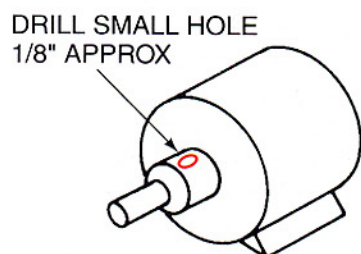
The motor housing may be drilled and penetrating oil forced into the bearings for a temporary repair. The only permanent repair is to replace the motor.
